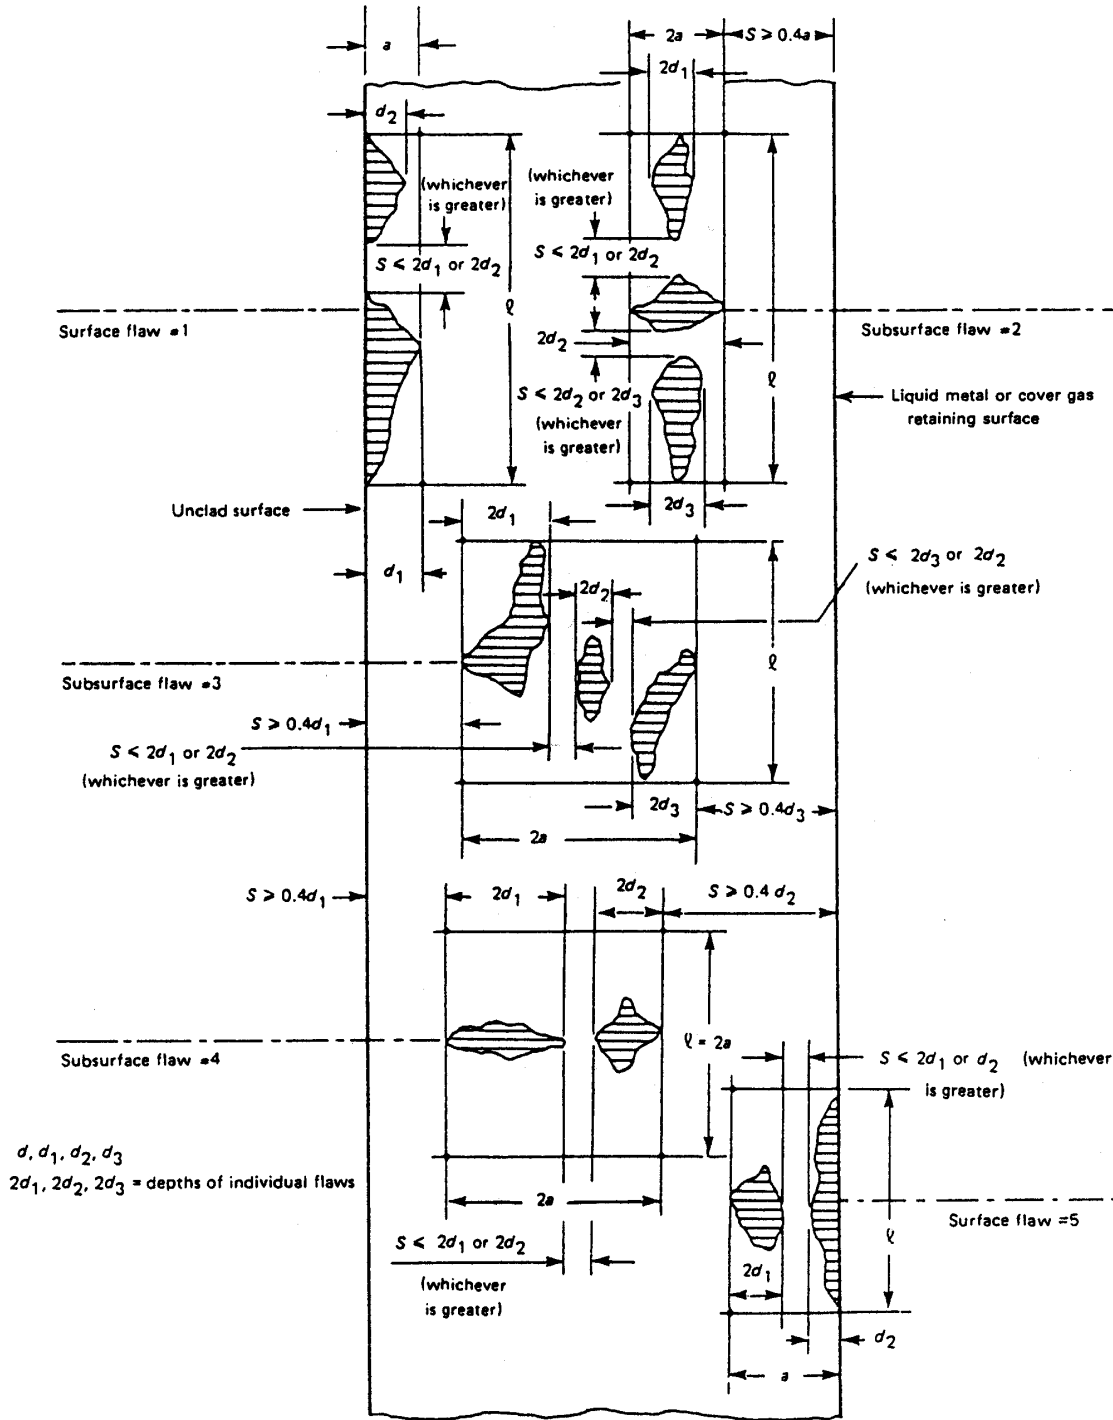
Multiple Planar Flaws Oriented in Plane Normal to Pressure Retaining Surface
